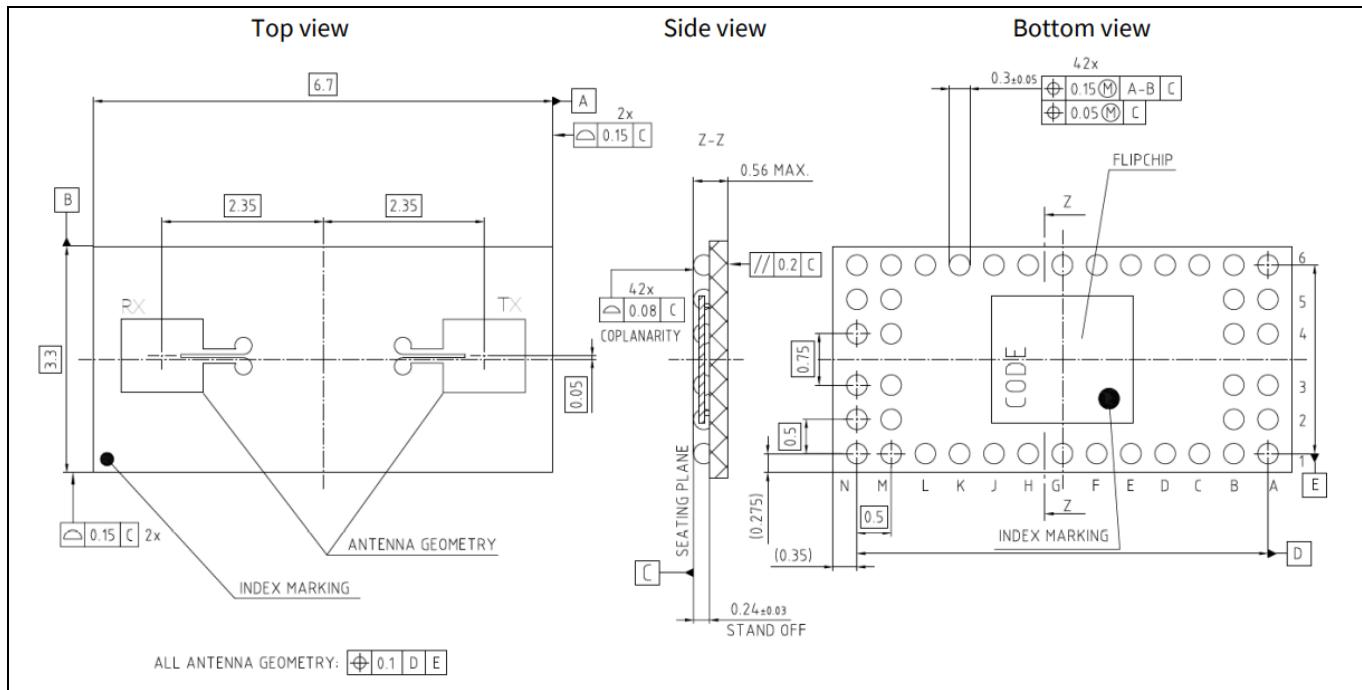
Top, side, and bottom views of the BGT60LTR11AIP MMIC package – all dimensions in mm
